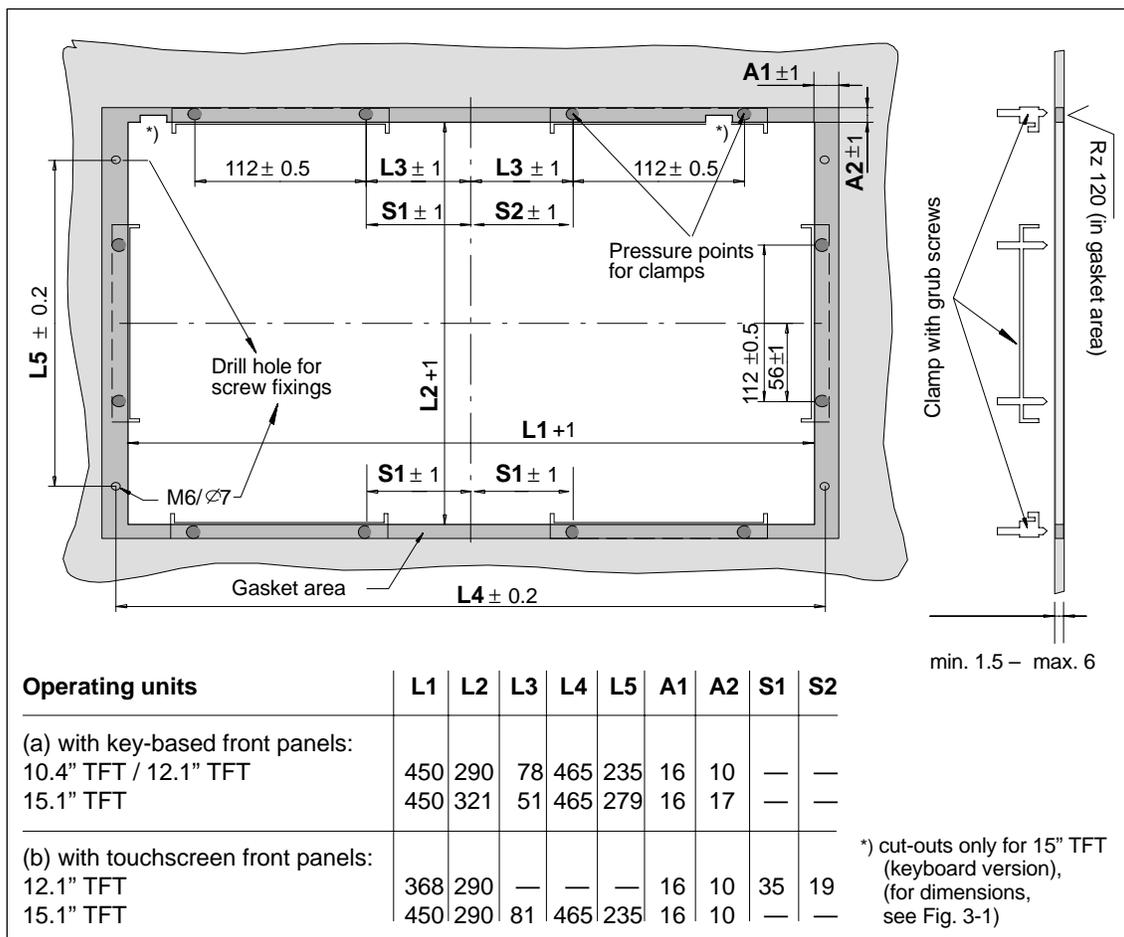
Dimensions for installation of the operating unit of Panel PC 670
